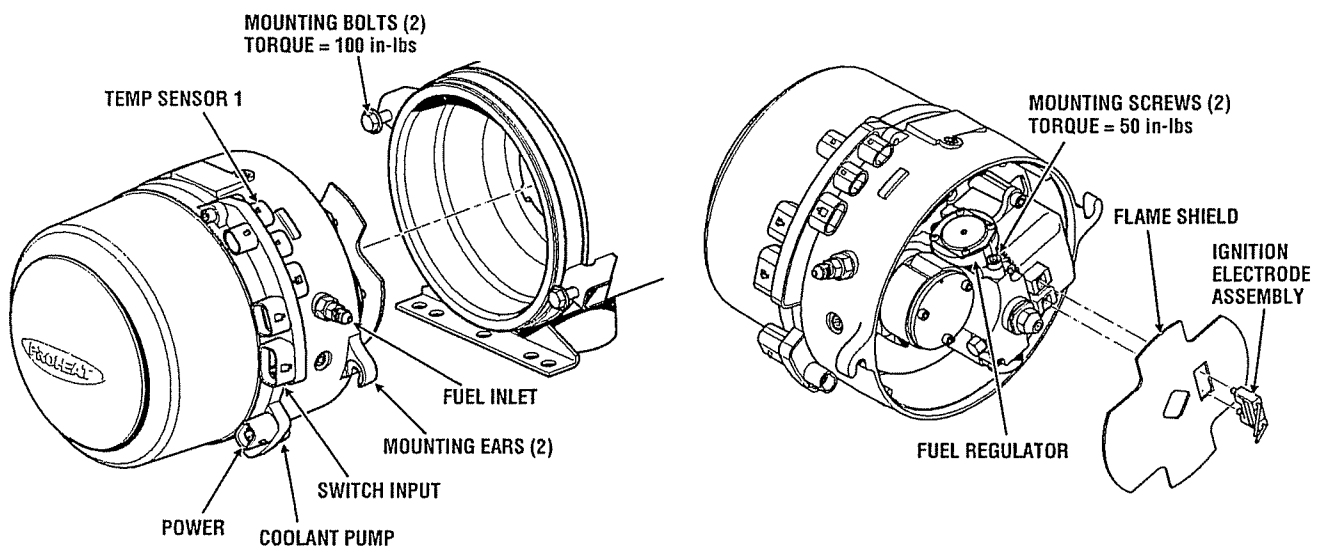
Burner Head Removal and Fuel Regulator Removal
